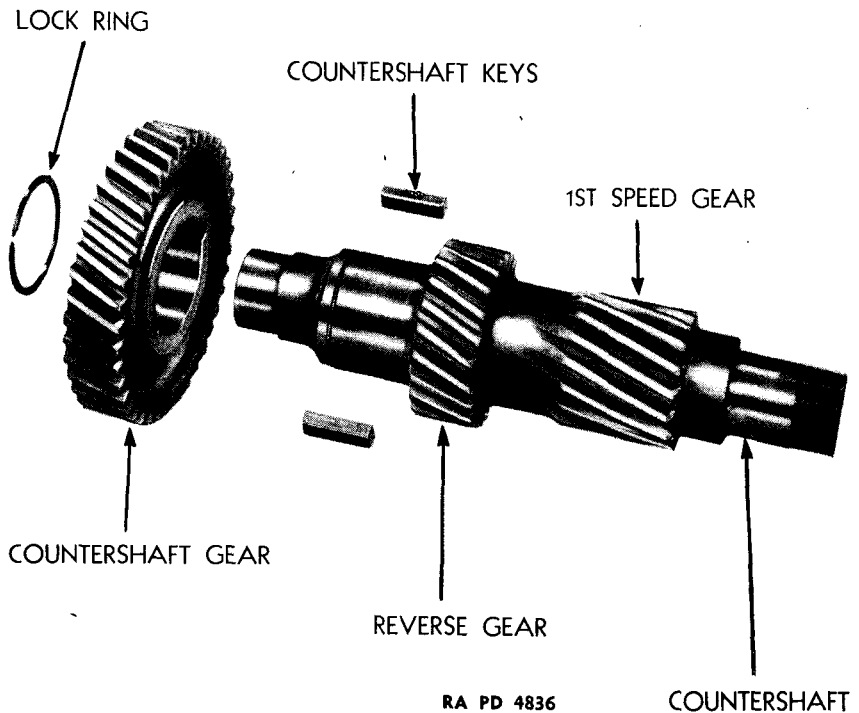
COUNTERSHAFT ASSEMBLY
